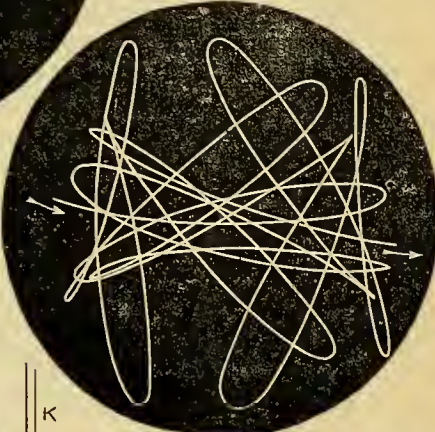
PATH TRACED BY CENTRE OF SPECULUM OVER TOOL IN ROSSE MACHINE.
